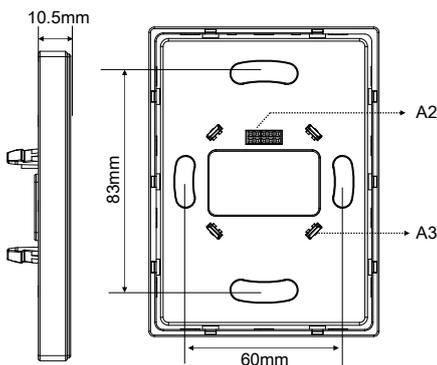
Dimensions - Side View Figure 9. Dimensions - Back View
